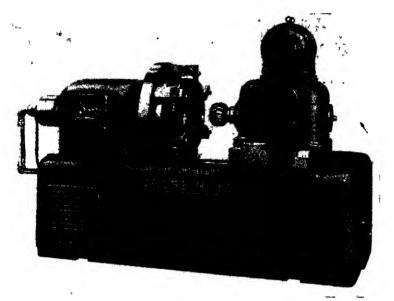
A Cross Mil-lathe or rotary milling machine.
